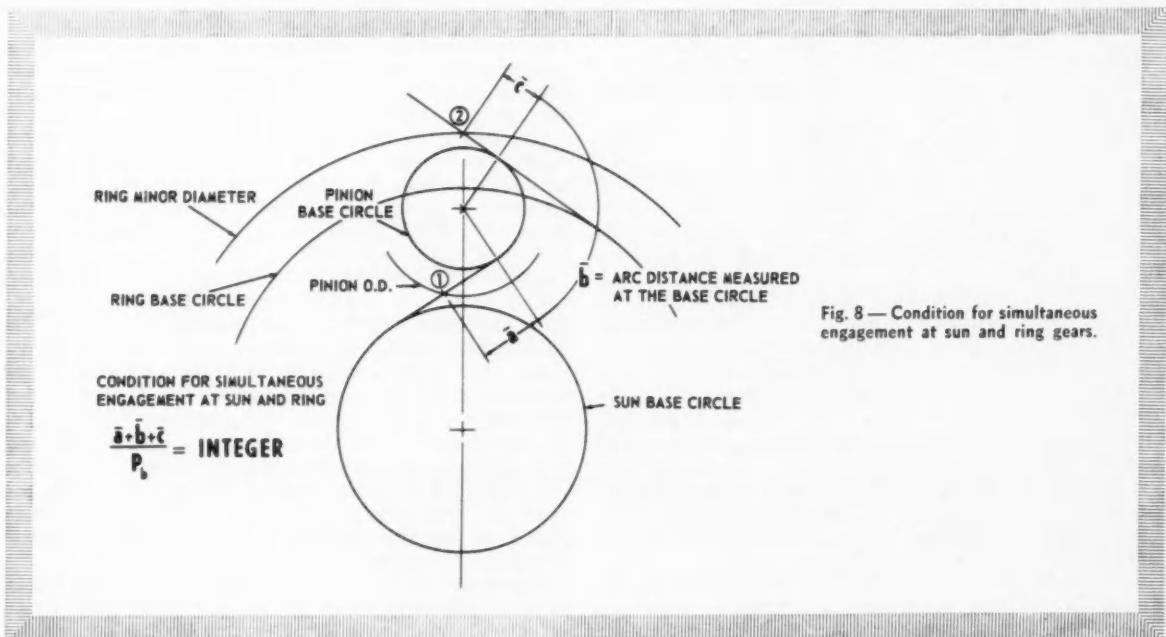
Condition for simultaneous engagement at sun and ring gears.
